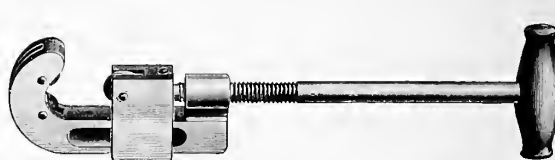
BARNES 3-WHEEL PIPE CUTTER.
